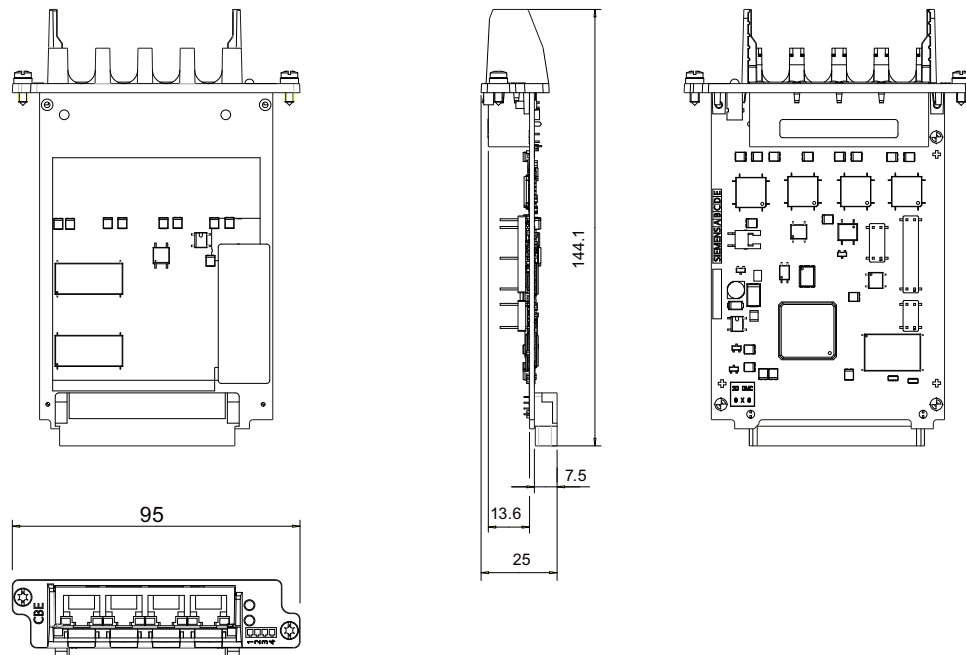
CBE30-2 dimension drawing (dimensions in mm)
